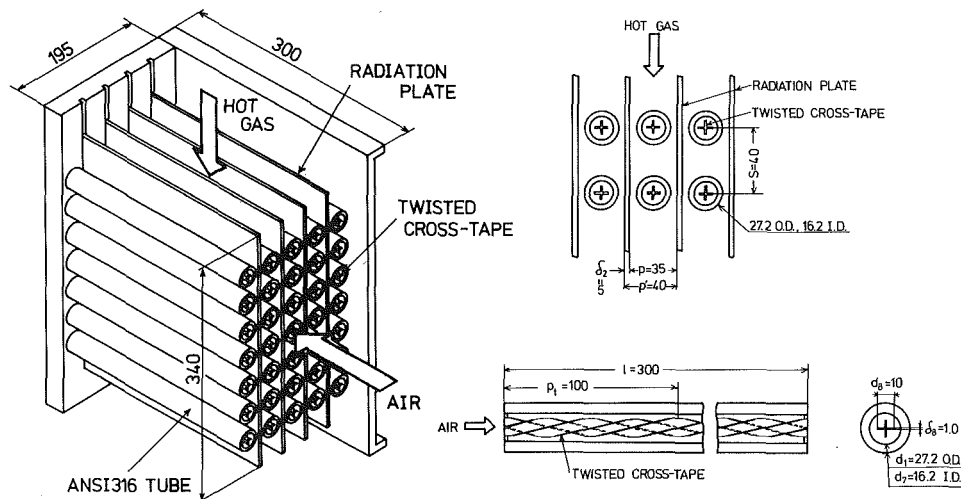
Augmented heat exchanger assembly with tube, radiation plate, and twisted cross-tape arrangements with all dimensions in mm
